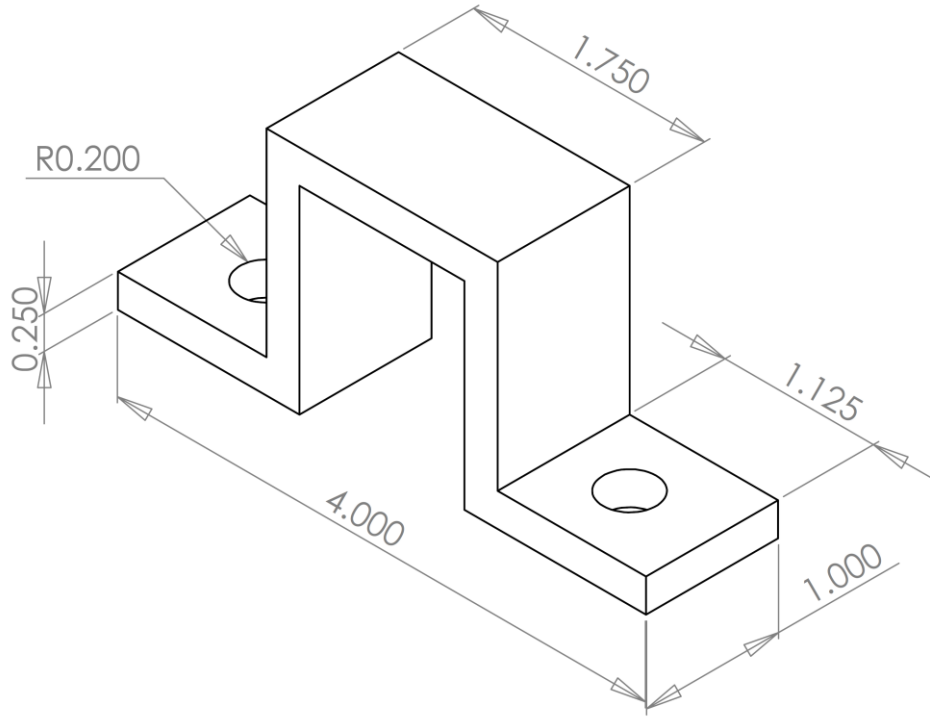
Fixture Bracket w/ Dimensions in Inches
